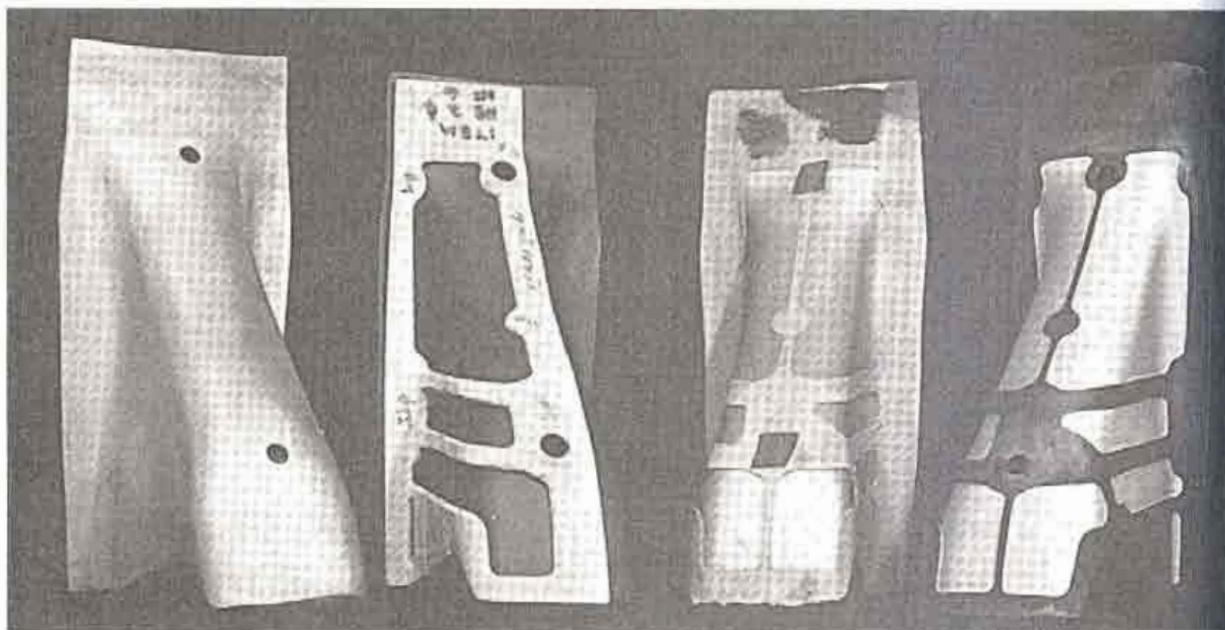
Inconel 718 aircraft engine parts. These sheet metal parts for a jet fighter engine are chemically milled to remove weight. (Left) As-formed workpiece; (middle left) workpiece coated with liquid rubber, fiberglass scribing template in place; (middle right) scribed workpiece; (right) finished part. About 0.035 in. of stock is removed from the 0.070-in.-thick workpieces. Tolerances are held to ± 0.004 in.
